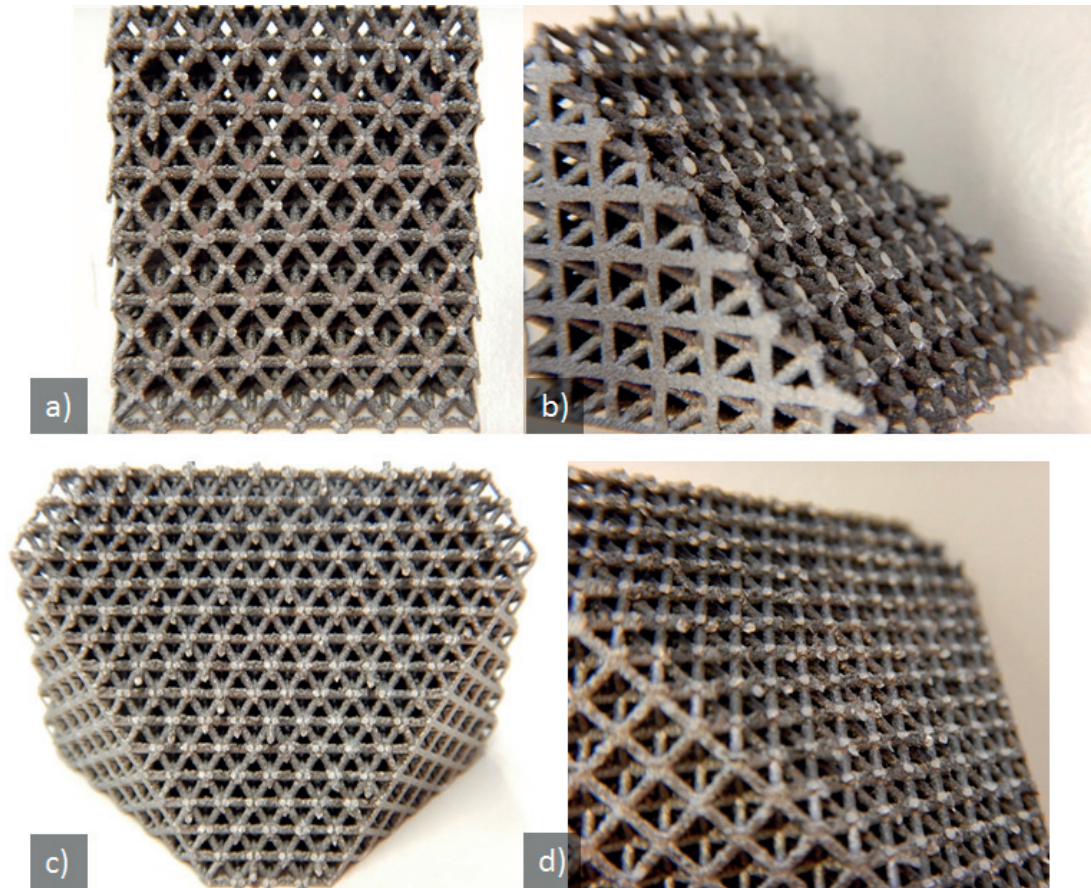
Fracture surface photos of a BCC sample (a) and b)) and an Oct sample (c) and d))
